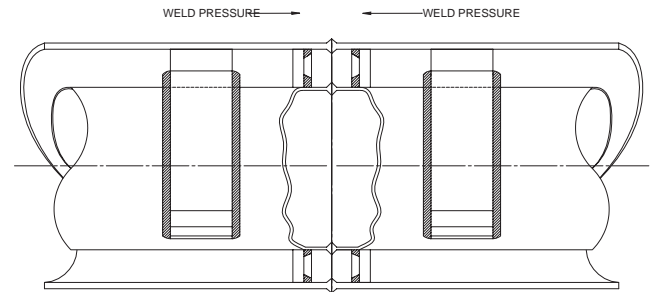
Bring pipe ends together, and apply welding pressure
